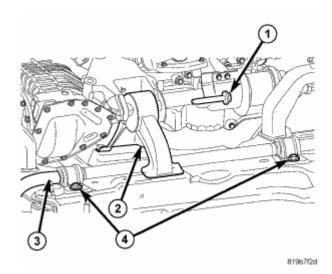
Identifying Rear Torque Mount Courtesy of CHRYSLER LLC
